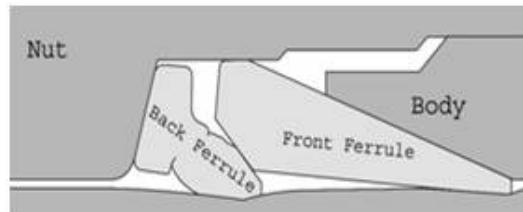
Tube fitting with advanced geometry Back Ferrule prior after make-up
